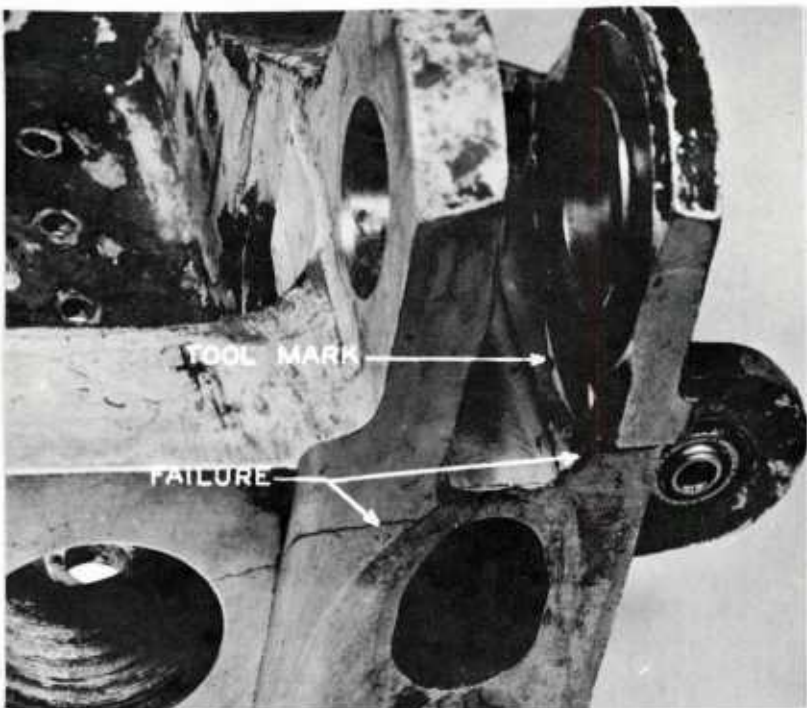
Fatigue failure of wing-fold fitting.
